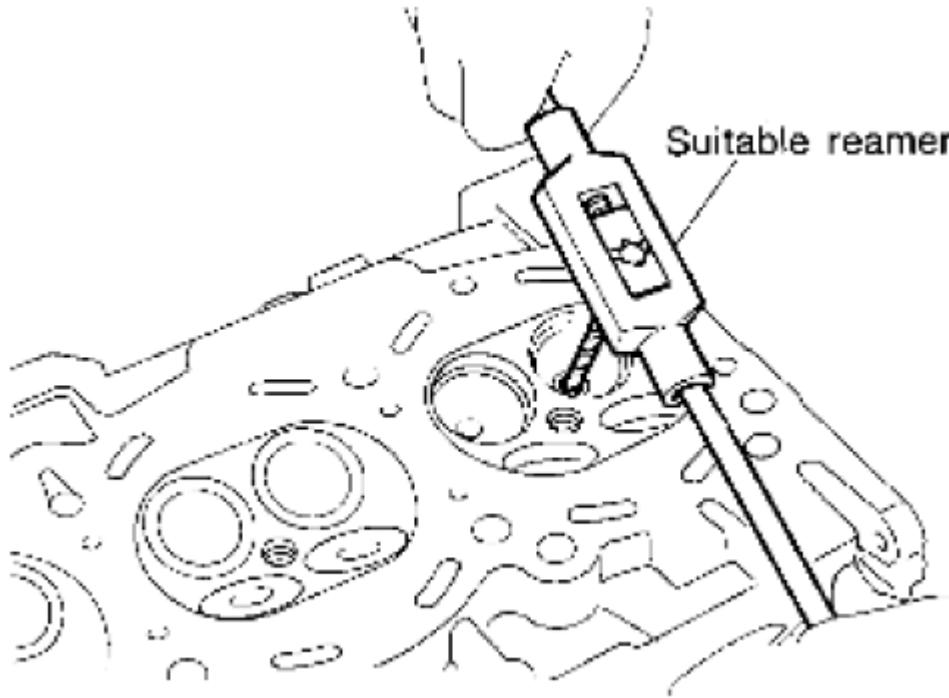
Applying Reamer Finish To Valve Guide Using Suitable Tool
